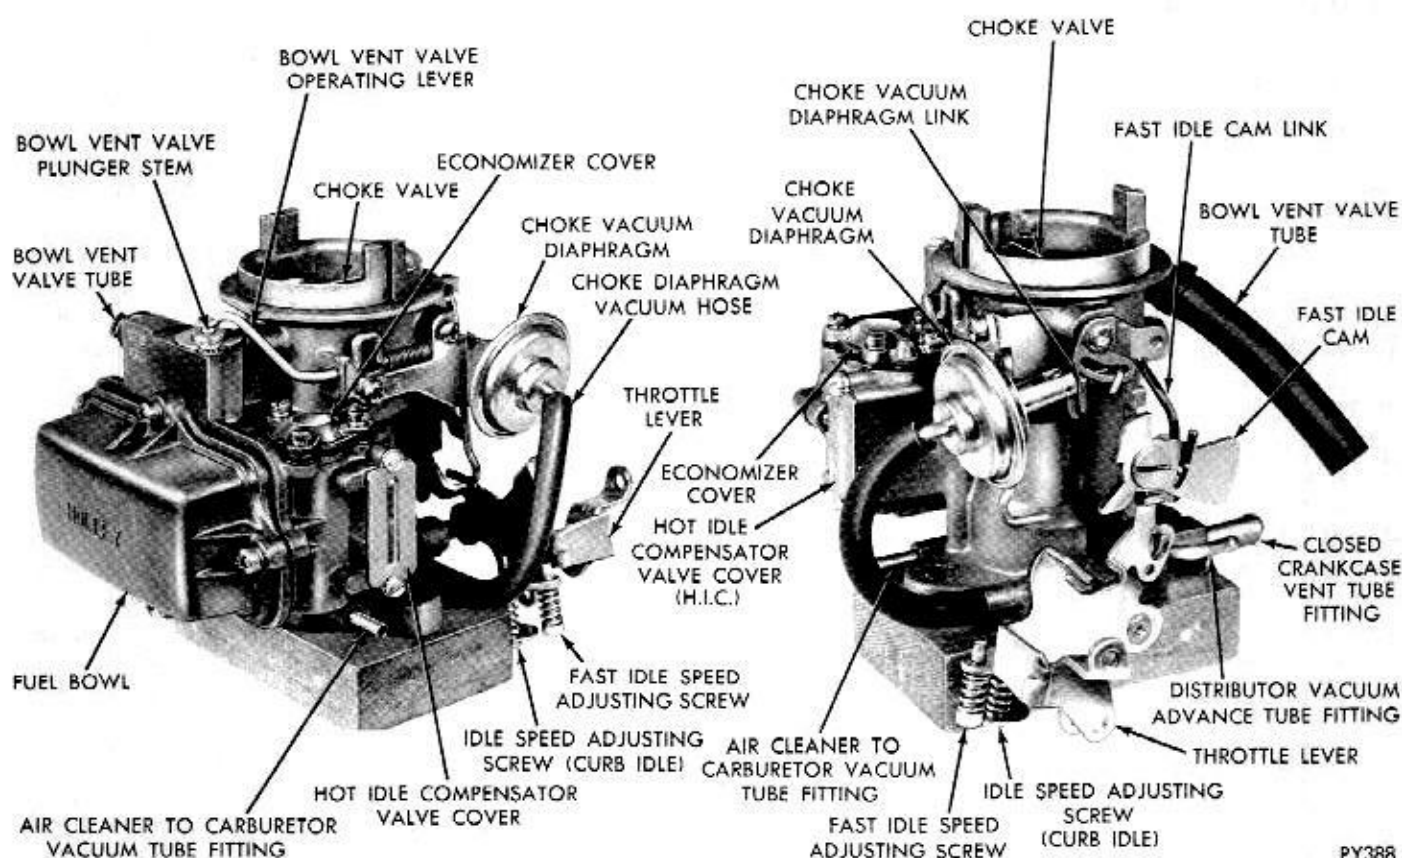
Carburetor Assembly (Holley 1920 Series) E.C.S.
